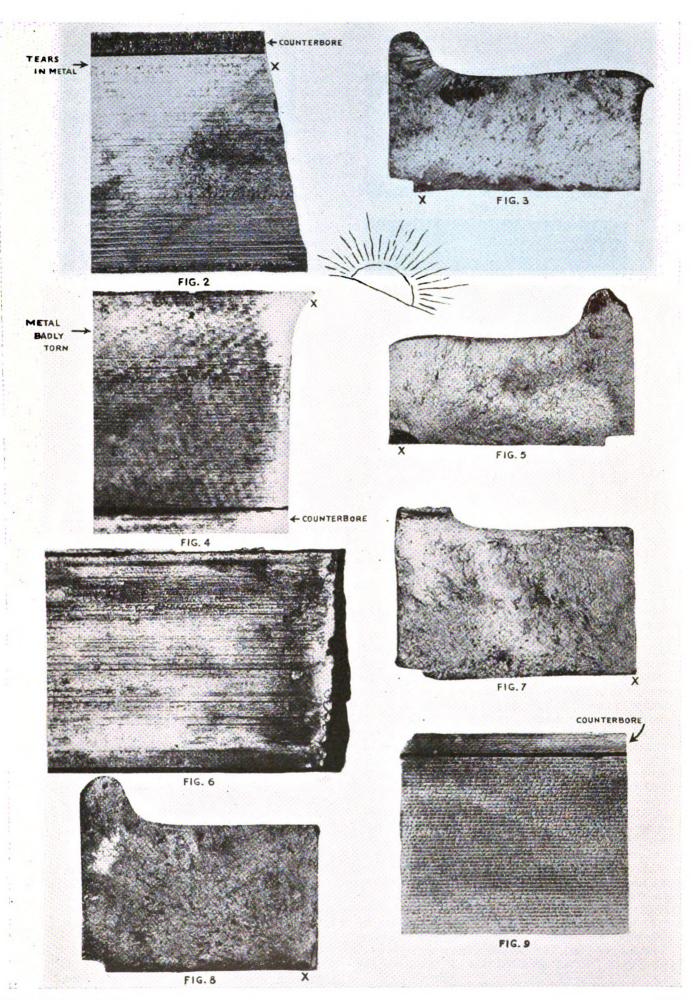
View of inside of tire; dark section at top is the counterbore. Fatigue crack started at X because of tears in metal by rough machining. Fig. 3—Fatigue crack at X started from rough finish shown in Fig. 2; fracture radiates from it like a sunburst. Fig. 4—This finish in the bore of the tire is somewhat finer than that shown in Fig. 2. Fatigue crack started at X. Note the tears in the metal. Fig. 5—Cross-section of fractured tire, the machine finish in the bore of which is Shows machine finish in bore of tire which was fractured in several places. This finish is fairly smooth, as compared to previous illustrations. Fig. 7—This small fatigue crack in the tire, the machine finish in the bore of which is shown in Fig. 6, started at the sharp corner. Note the sunburst effect in the fracture. Fig. 8—Another fatigue crack in the tire shown in Figs. 6 and 7; not at the sharp corner in this instance. Fig. 9—This tire, with its rough finish in the bore, broke in nine places, four of the fractures showing well-defined fatigue cracks
